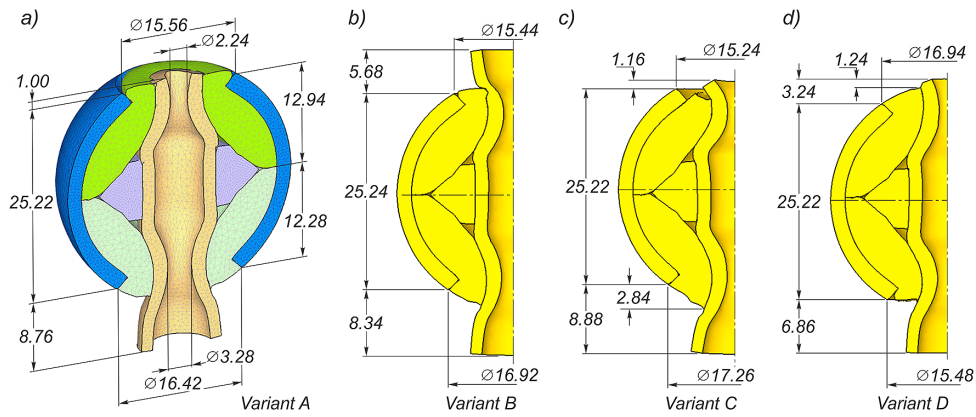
Shape and dimensions of the forging made of steel and deformed inserts depending on the variant of the insert assembly setup
